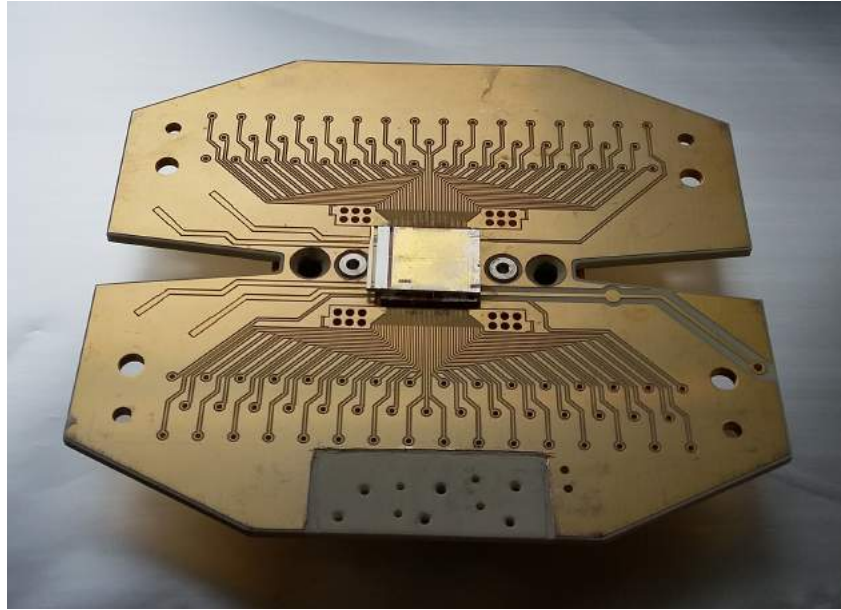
The front in-vacuum PCB with a wirebonded chip in place as assembled and bonded by David Murgia. The chip sits atop the magnetic spacer which is subsequently glued into a recessed copper block as discussed in Chapter 3.
